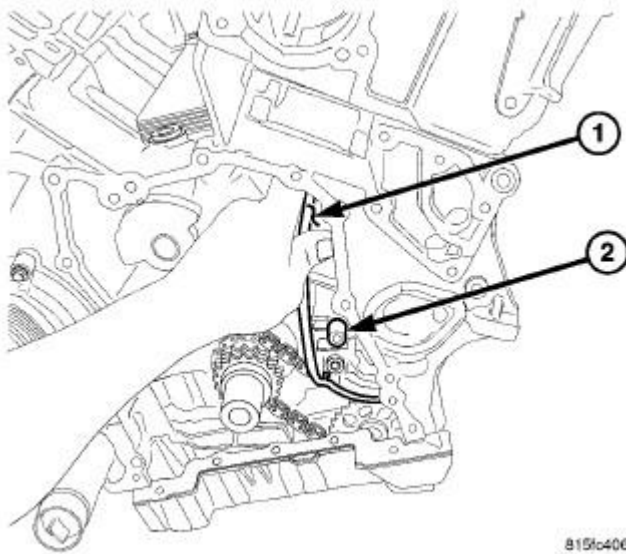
LEFT LOWER TIMING CHAIN GUIDE AND FASTENER
